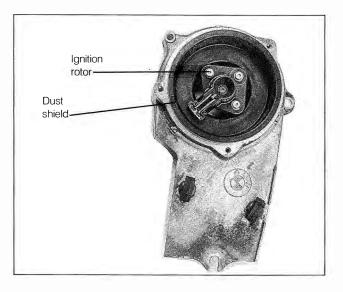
Ignition rotor and dust shield. Front camshaft oil seal is behind dust shield.
